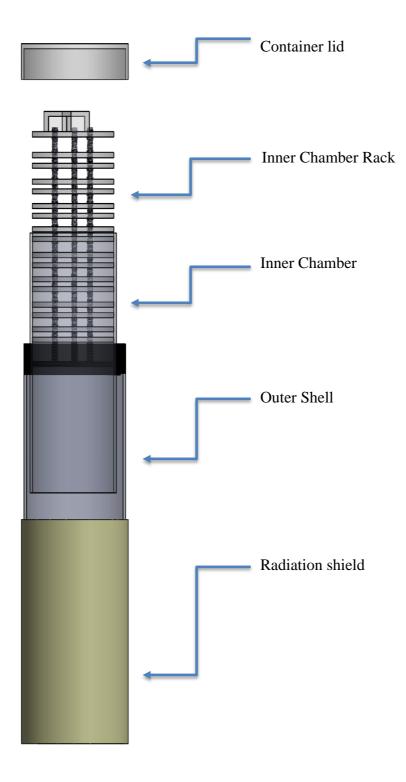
shows an exploded view of the complete container with all major parts labeled.
